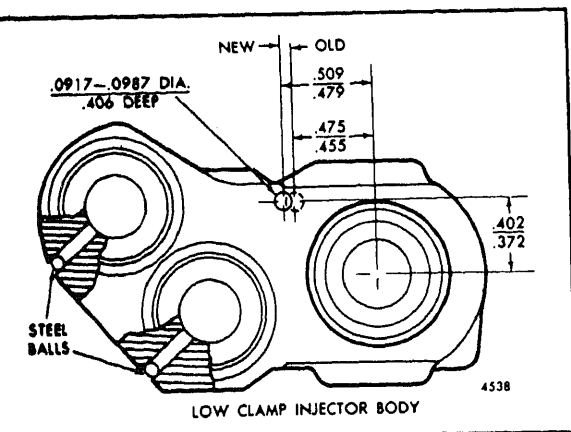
Relocating Timing Pin Hole in Injector Body
